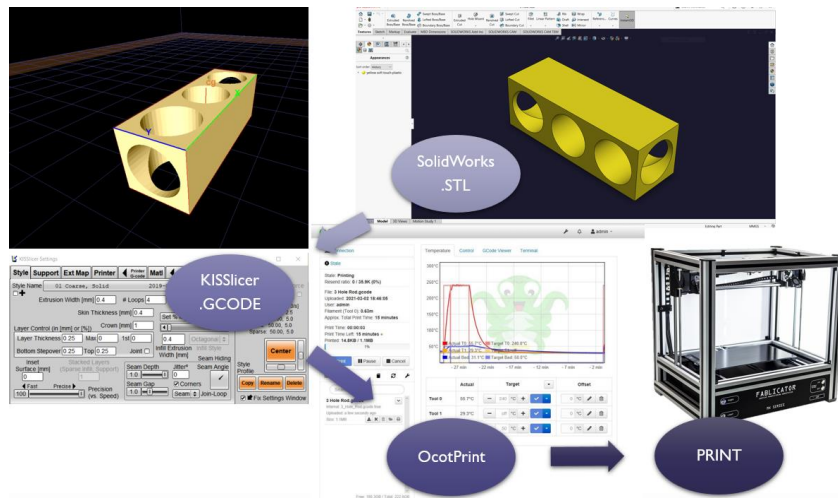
Remotely 3D Printing FDM process via OctoPrint.
